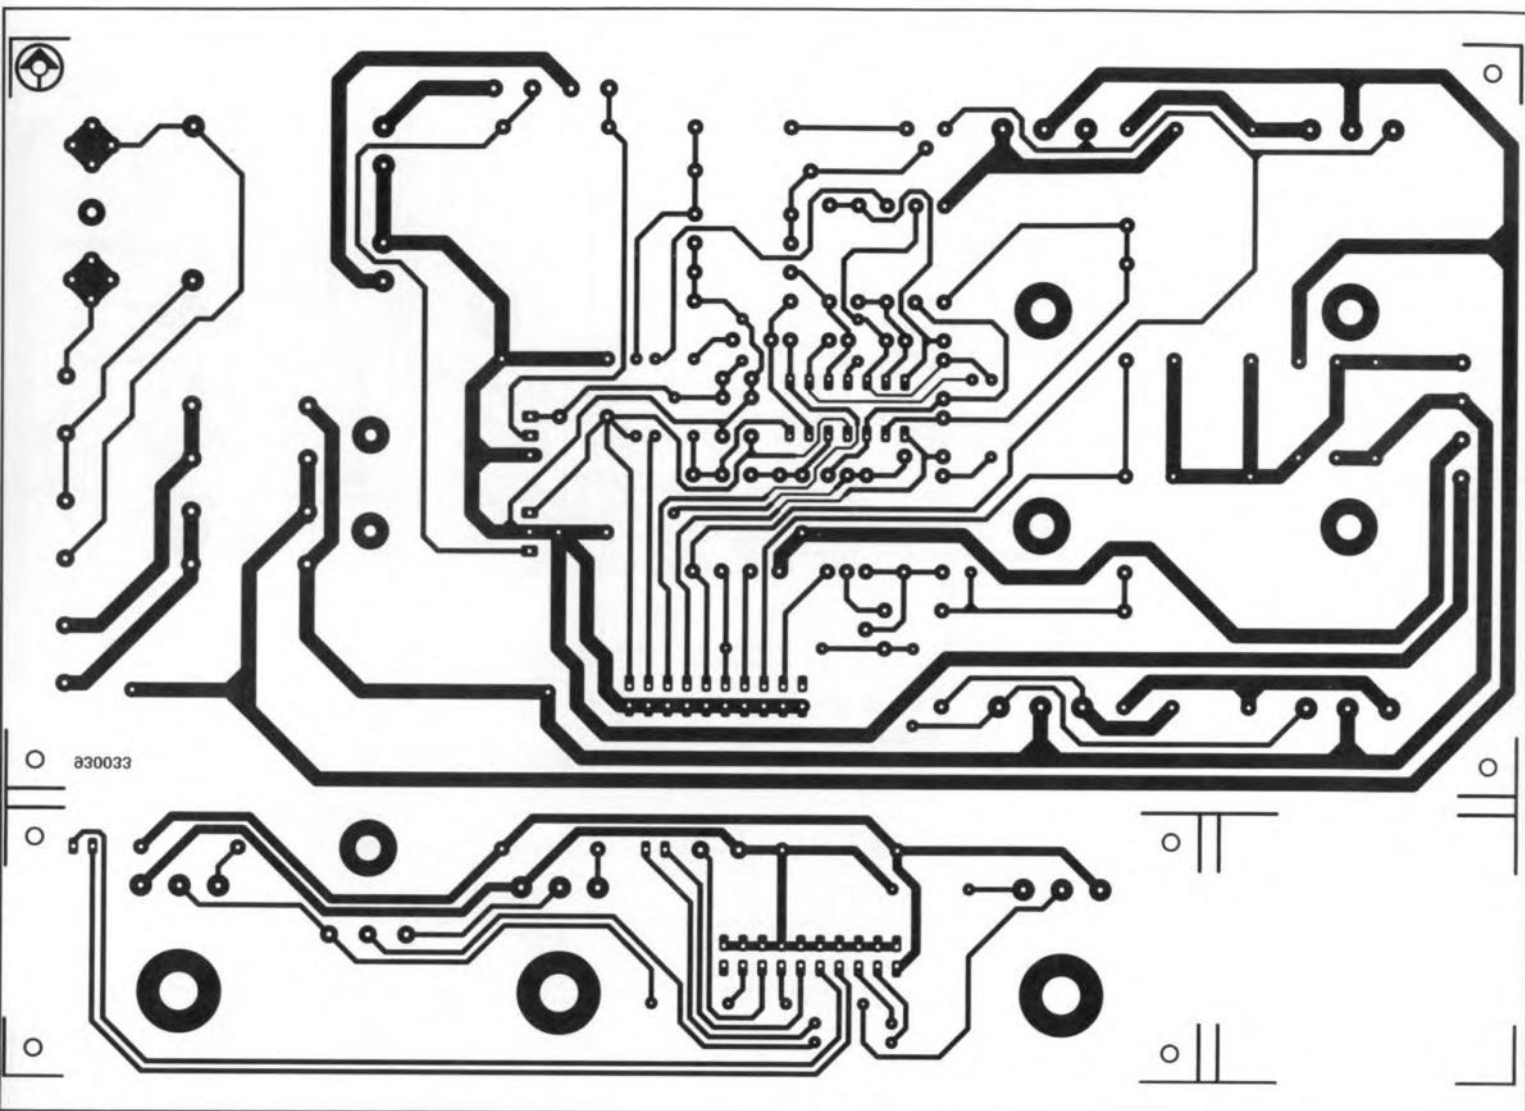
Printed-circuit board for the power supply unit – copper track layout.
